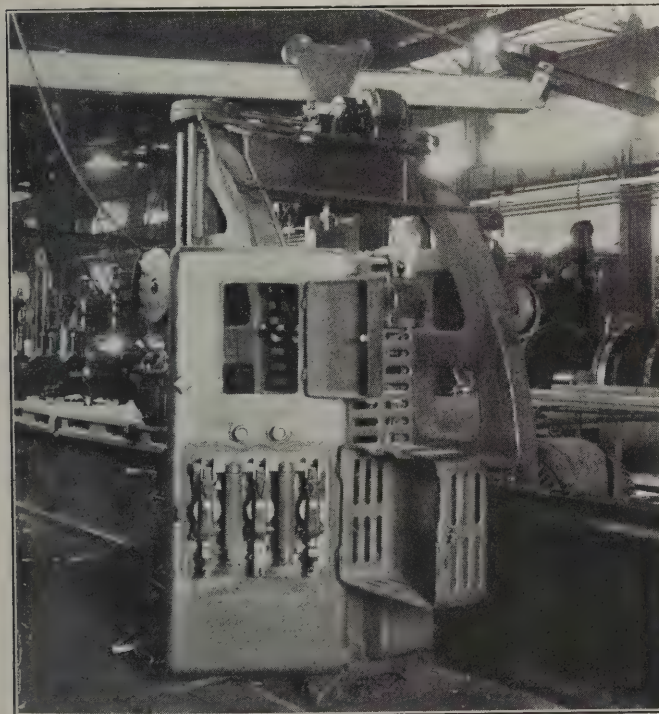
Niles-Bement-Pond Bed Planer with Automatic Reversing Motor Controller
